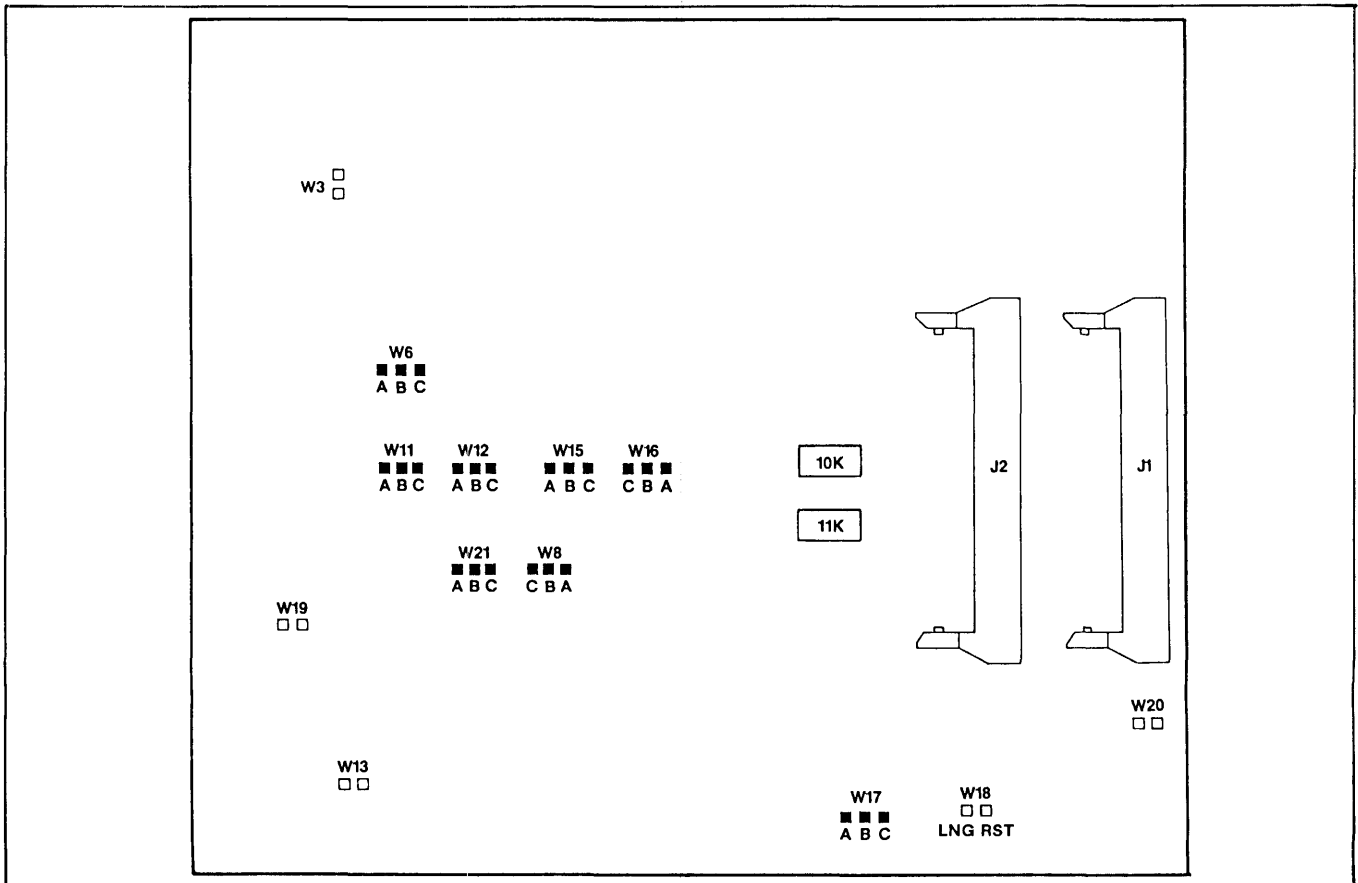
Jumper Locations for PCB Assembly 200248-21/22
